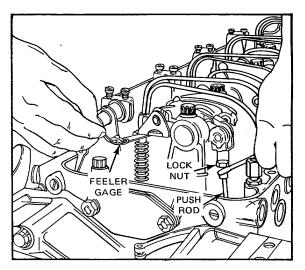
Adjusting Valve Clearance (Four-Valve Head)
